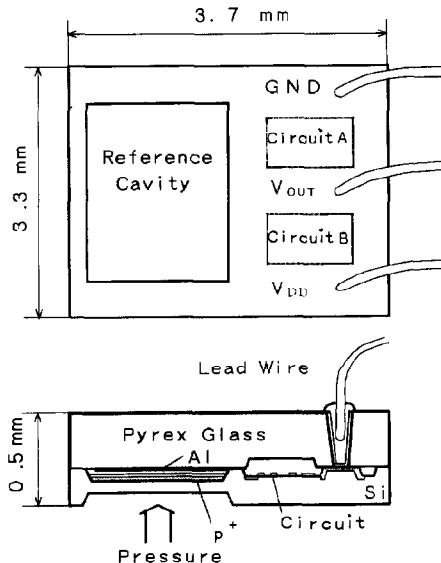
Plan and cross-sectional view of fabricated pressure sensor.
